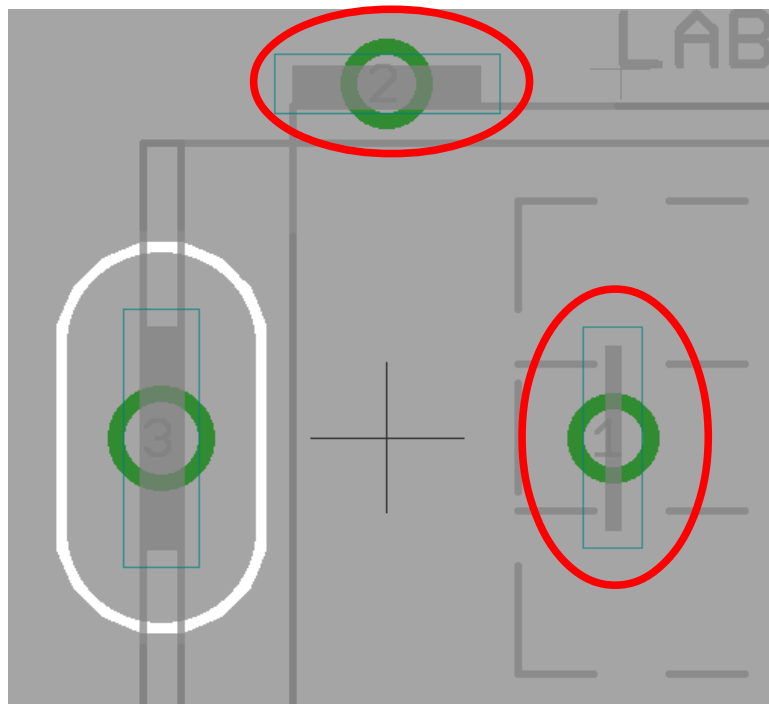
Inner Pad Shape after `make-long-pad-inner-layer.ulp`
